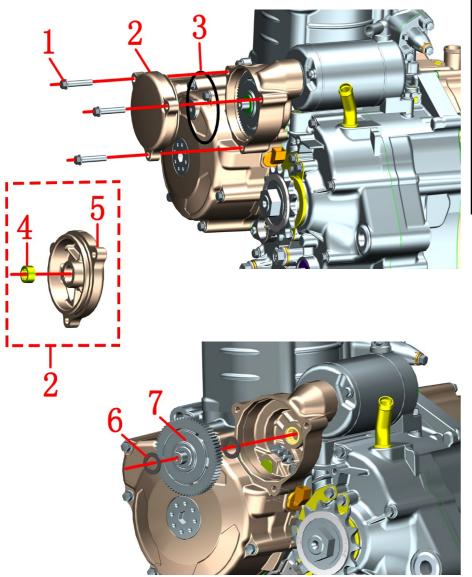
LEFT CRANKCASE		Disassembling the reduction gear	CHK
